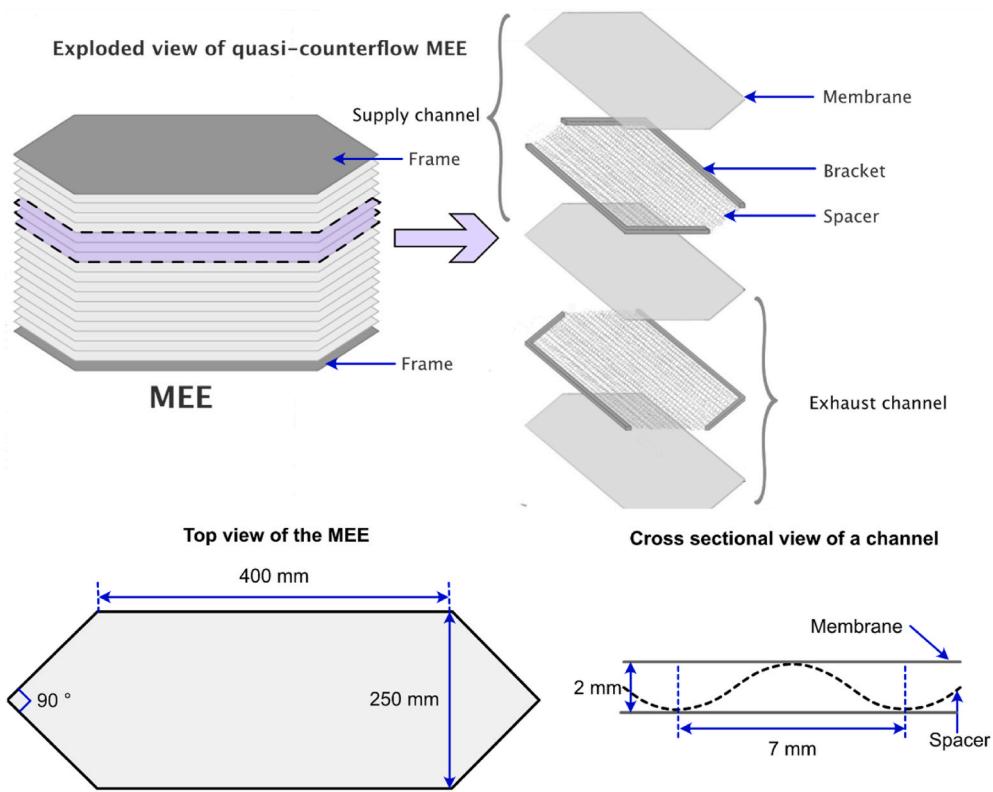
Exploded view, top view and cross-sectional view of the constructed quasi-counterflow MEE.
